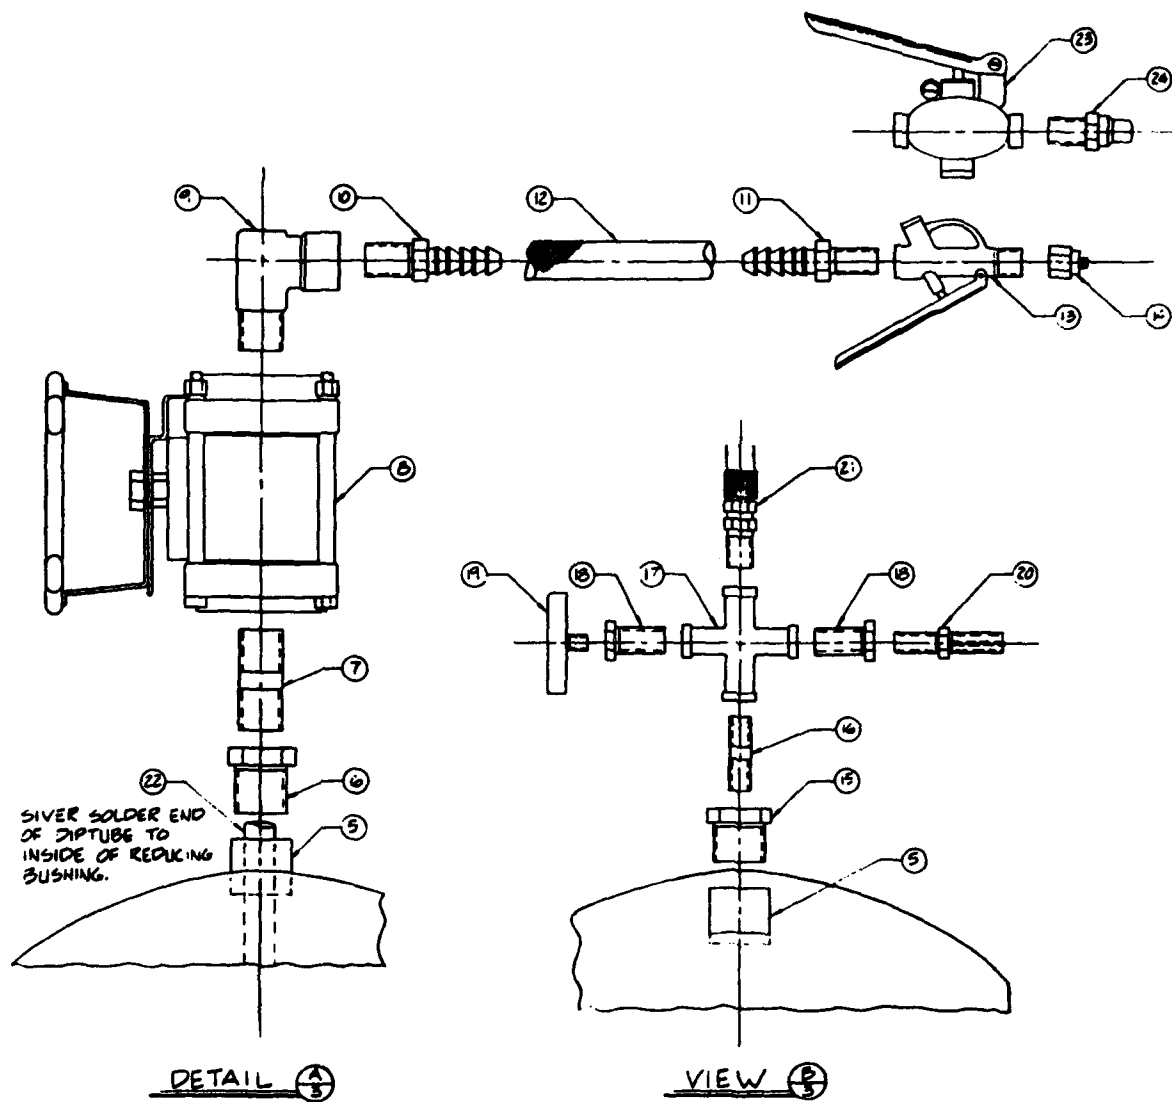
Prototype Extinguisher - Detail 3, External Fittings.
